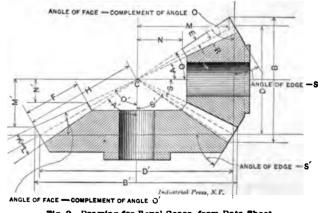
Drawing for Bevel Gears, from Data Sheet.
